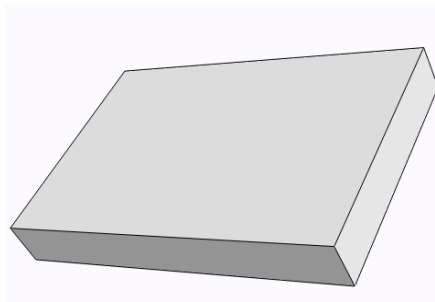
load and support plate are defend as steel solid plate( with dimension 150mm\*100mm\*20mm)
